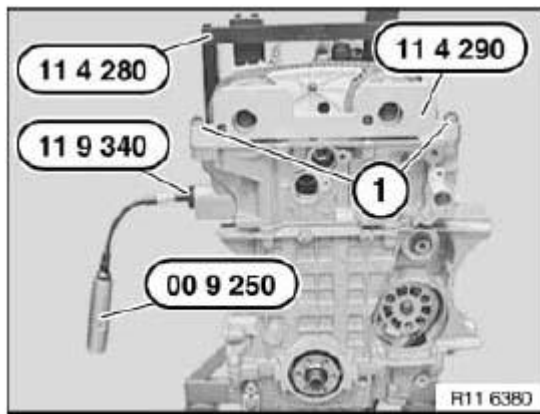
Identifying Special Tool (11 4 280), (11 4 290), (11 9 340), (11 9 350) And Cover Bolts
